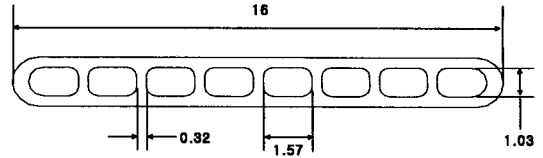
Cross-sectional view of the flat tube used in this study (Unit: mm).
